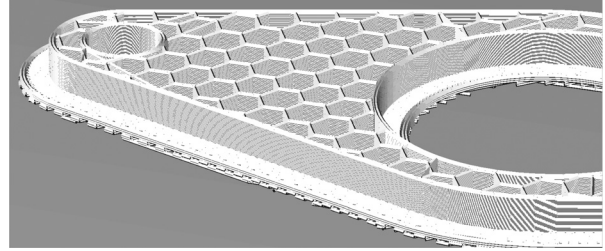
Part from Fig. 2(a) being built. Smaller hole will be completed before the larger hole (a datum for smaller hole).
